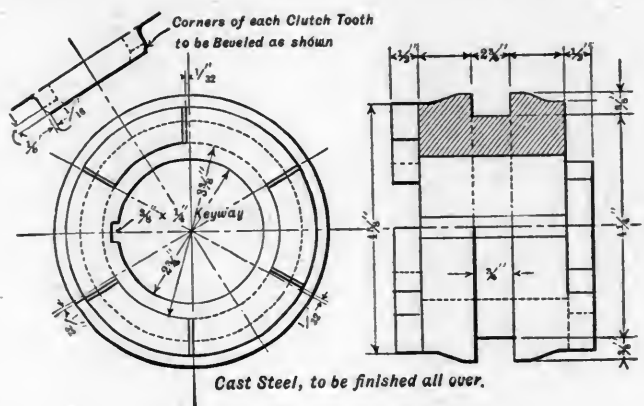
DETAILS OF THE DOUBLE JAW STEEL CLUTCH.
